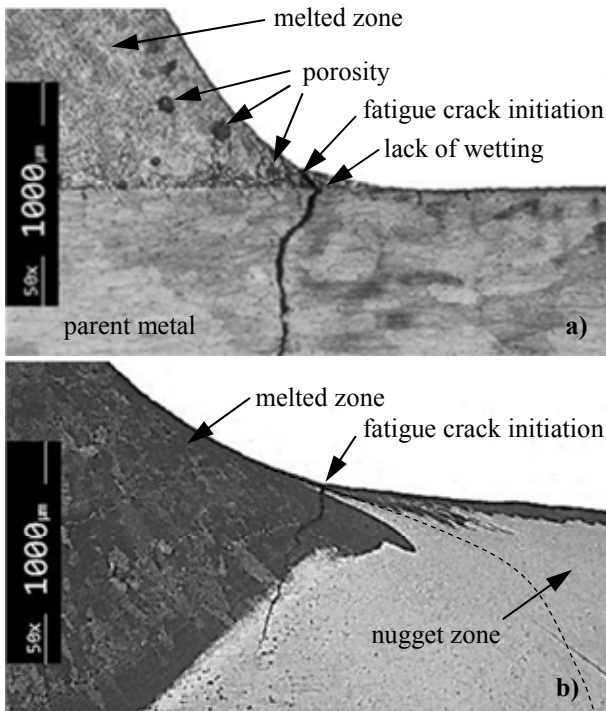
Crack initiation sites: a) MIG T-fillet weld toe; b) FS post-processed weld toe.
